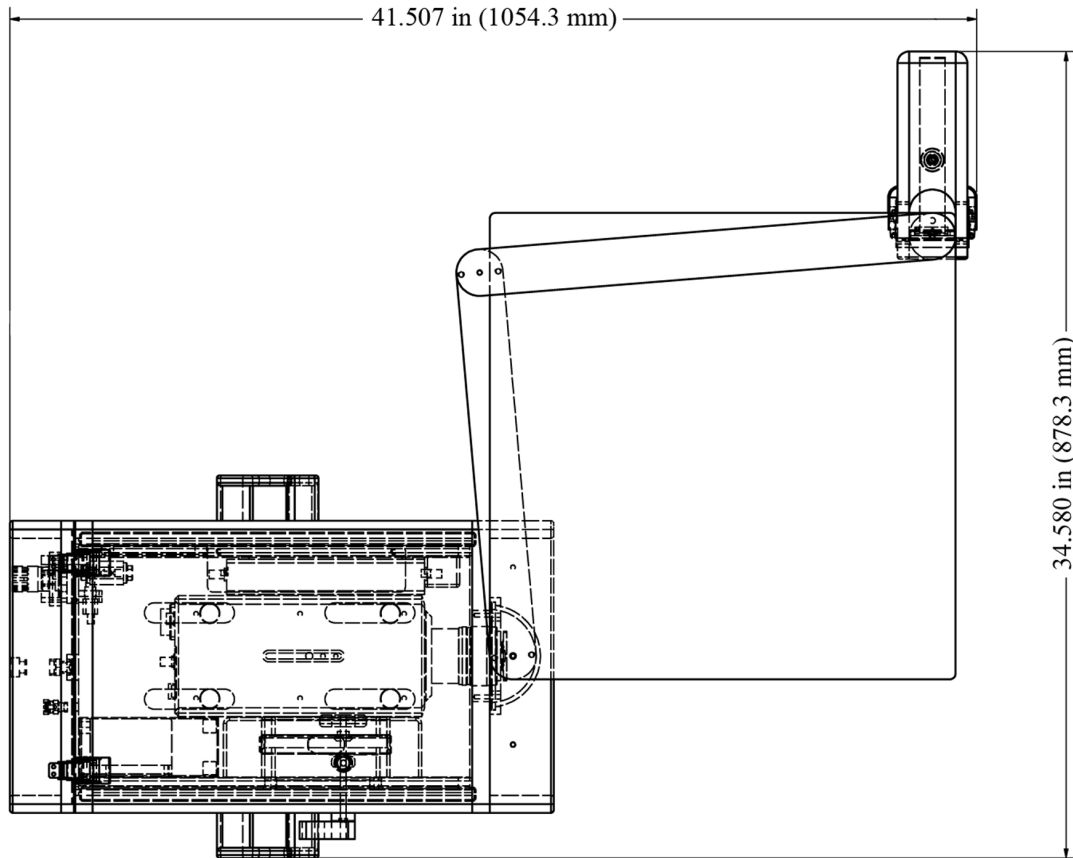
Dimensions of the attached laser and camera housings for the first-generation design of SCUVA, where the laser housing is in its deployed position. Dimensions are shown in inches (and millimeters in parentheses). Drawings are courtesy of Ken Sexton (Sexton Photographics).
